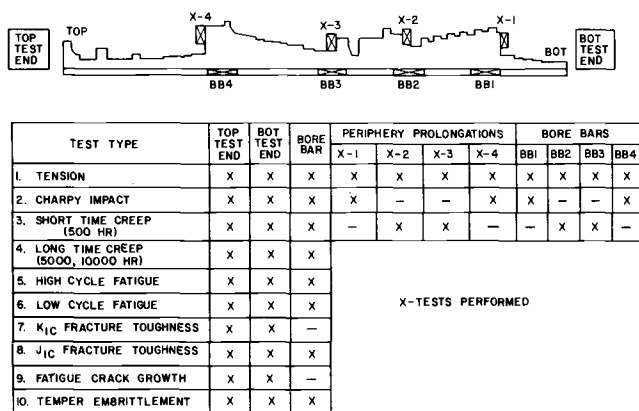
Diagram of the rotor forging, the test material locations, and the type of mechanical tests.
